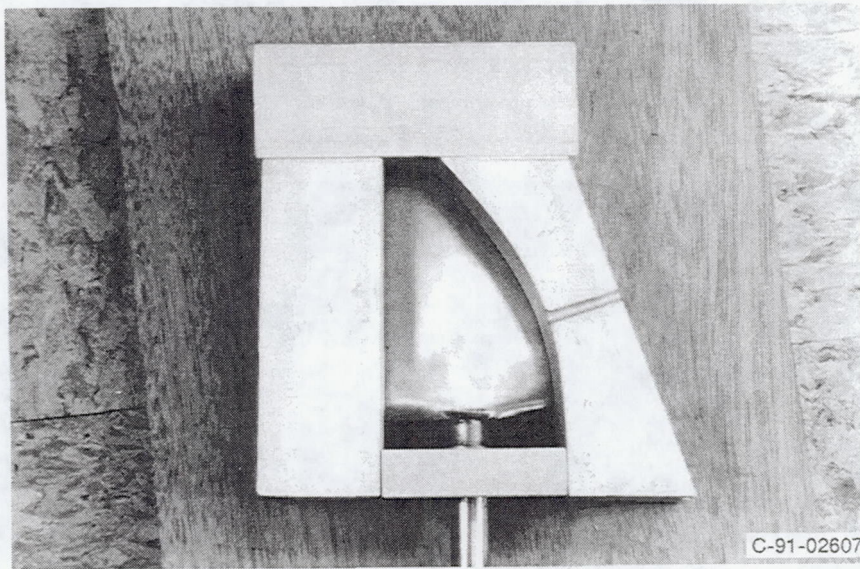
Master blade surrounded by dams prior to pouring male mold half.
